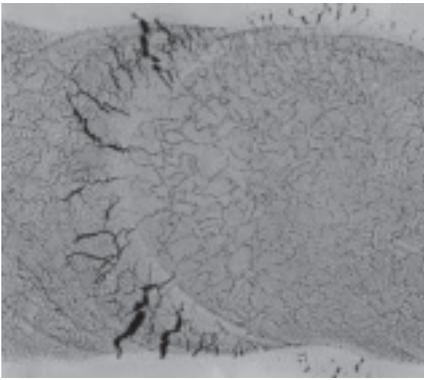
Hot cracks in 444 ferritic stainless steel weld.
